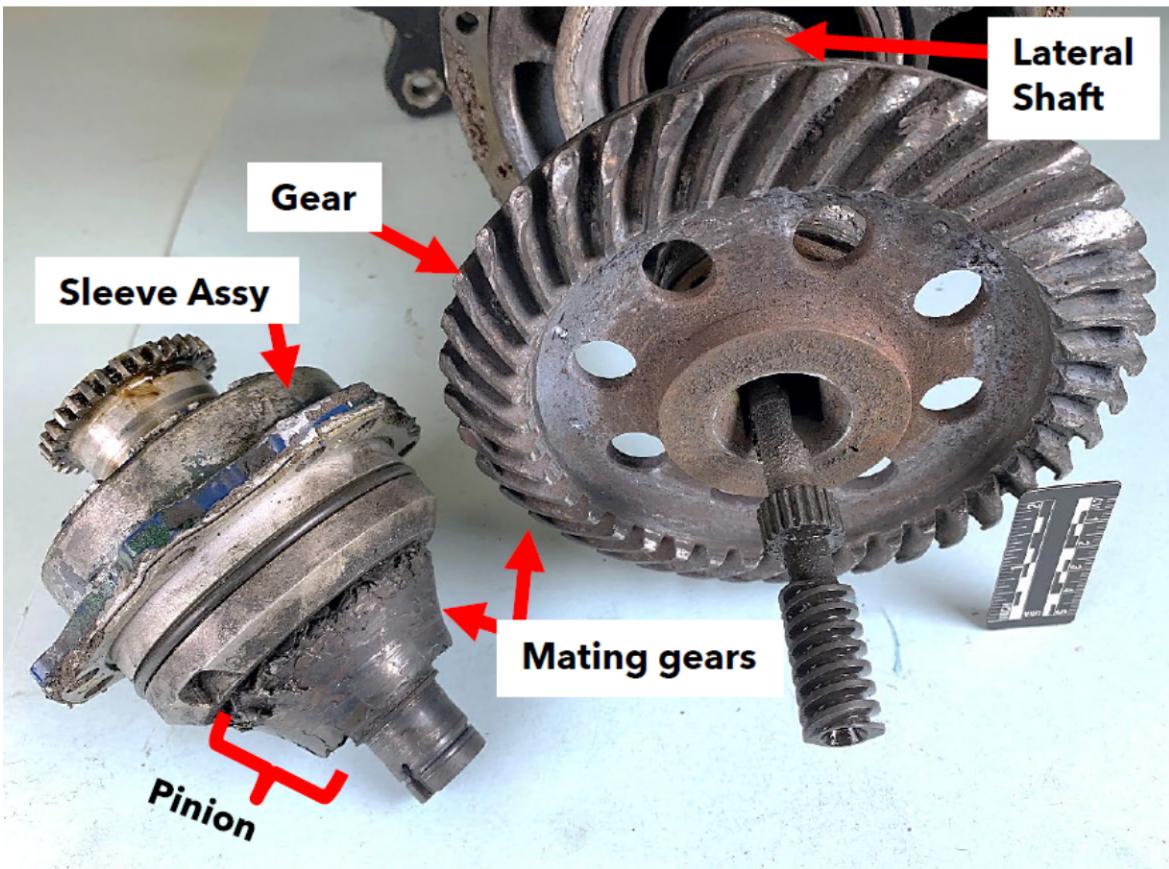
View of the internal components of the 90° gearbox and the damage to the pinion.
